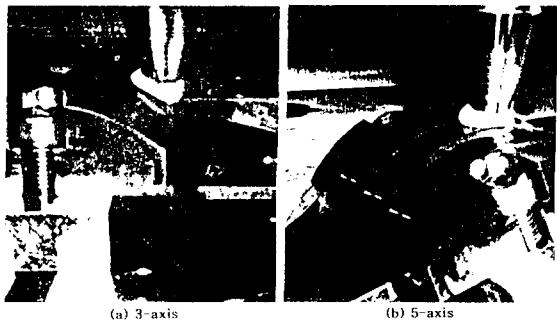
External Appearance of Magnetic Abrasive Polishing with 3-axis & 5-axis Control Machining Center
